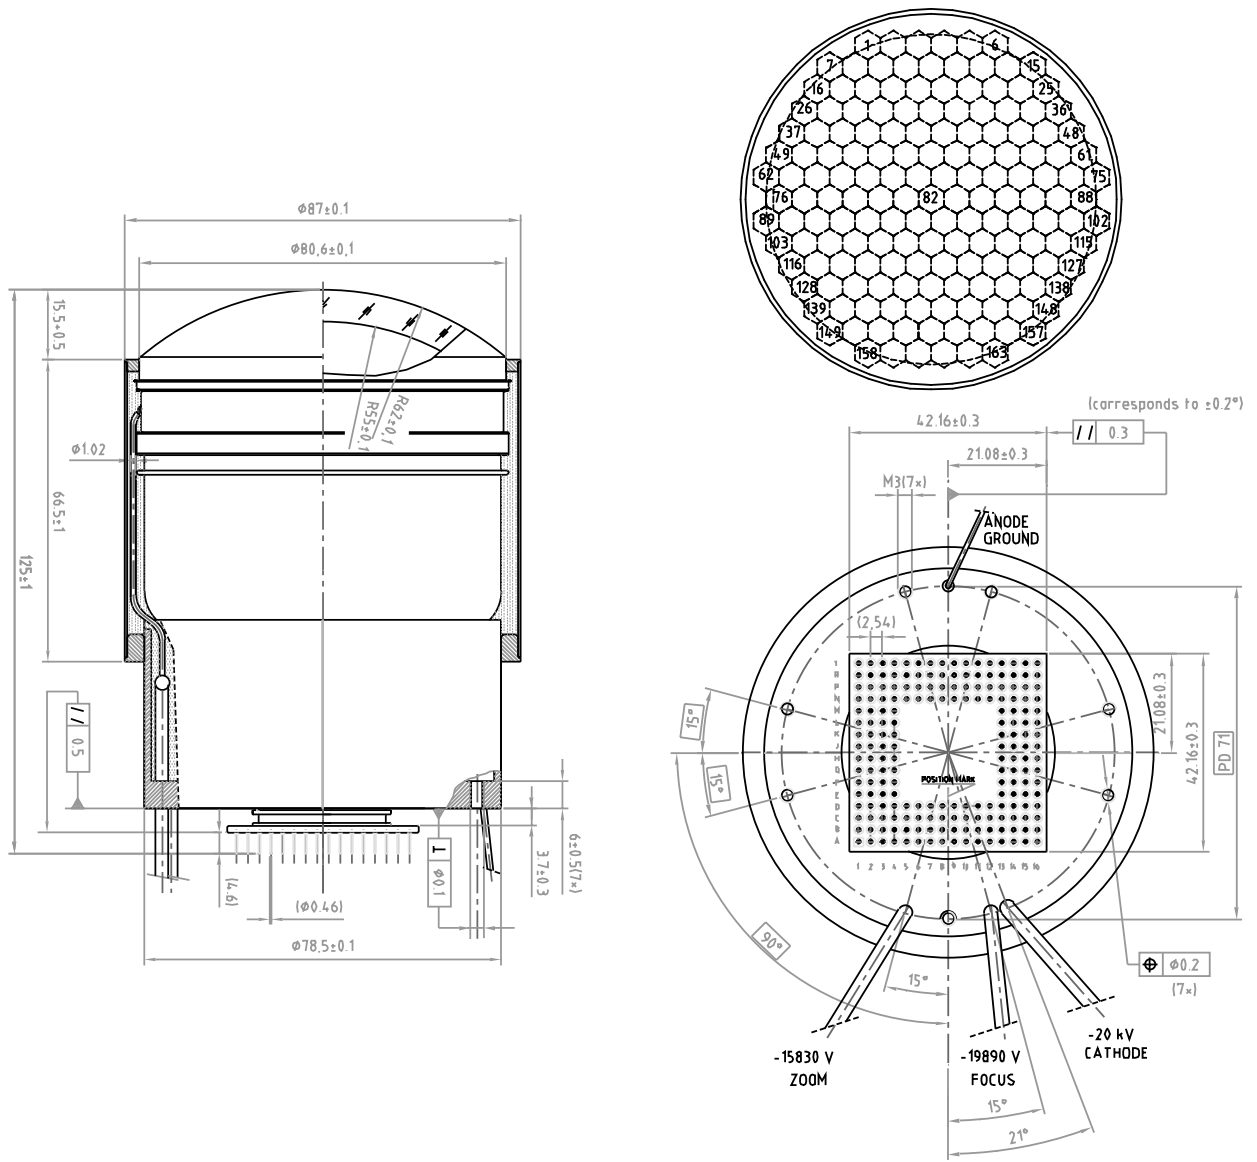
BTeV HPD (DEP PP0380AT). The outer dimensions are outlined on the left. The bare tube diameter is 83 mm. The insulated tube diameter is 87 mm. Silicon pixels (163 channels) on the cathode are shown in the upper right drawing. Pin layout is illustrated in the lower right picture.
